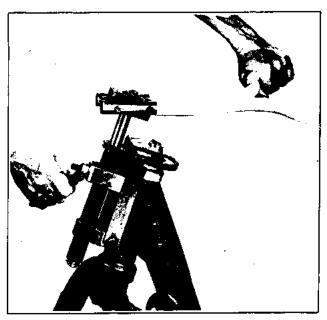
F-68. Adjusting Tiller Chain (1973 & Earlier) (Fork Housing Removed)
